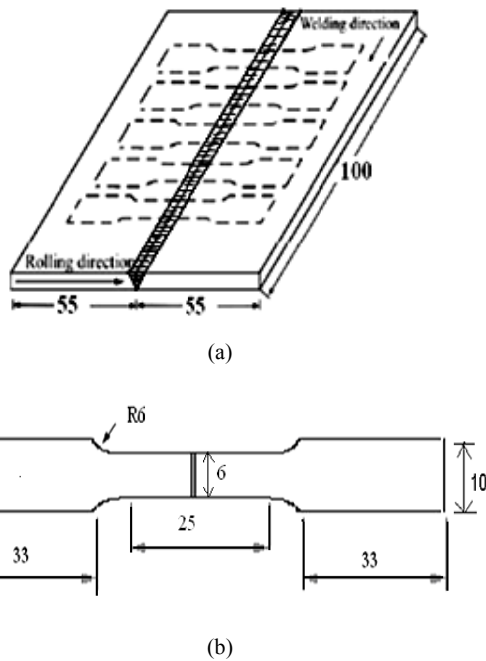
(a) Scheme of welding with respect to rolling direction and extraction of tensile specimens, (b) ASTM- E8 dimensions of flat smooth tensile specimen
